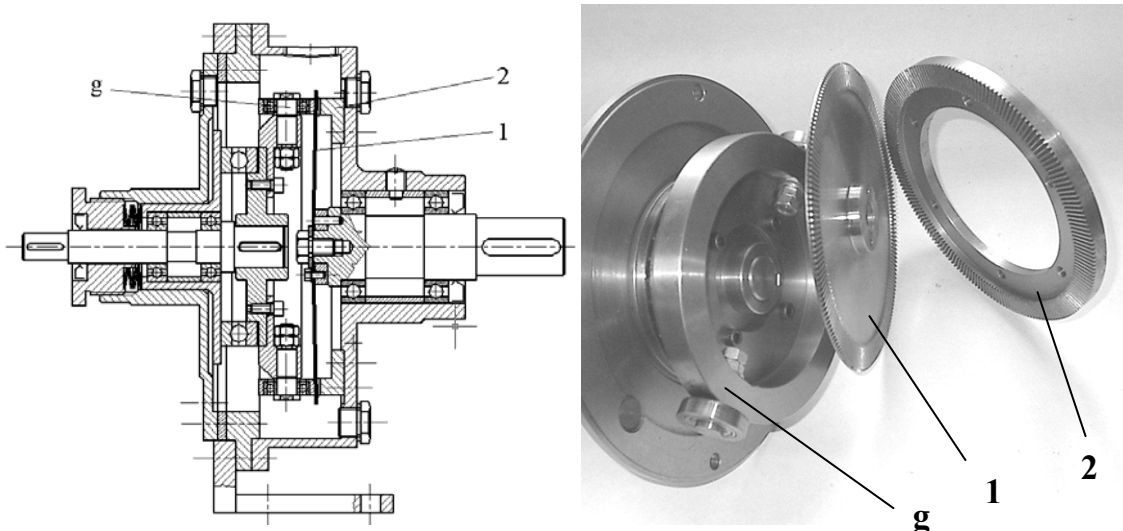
The investigated harmonic drive (1 – flexible gear, 2 – solid gear, g – wave generator)
